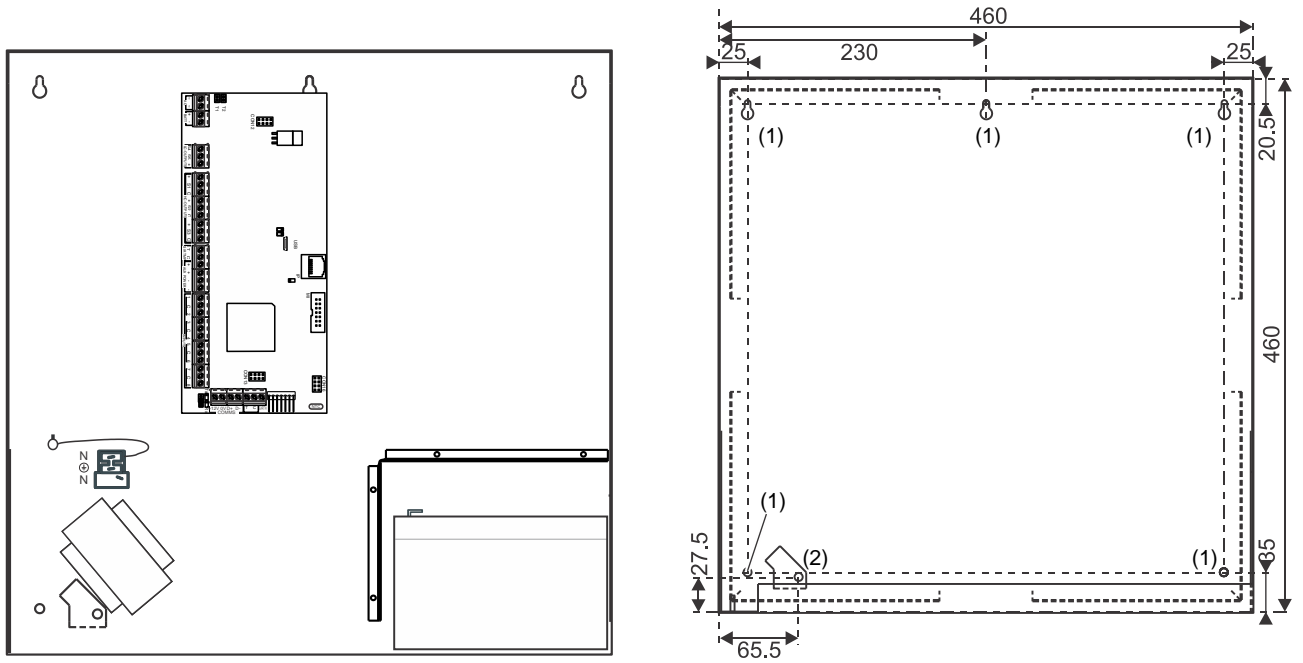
Medium (MM and MM+) and large housing (LM) pry-off tamper mount
